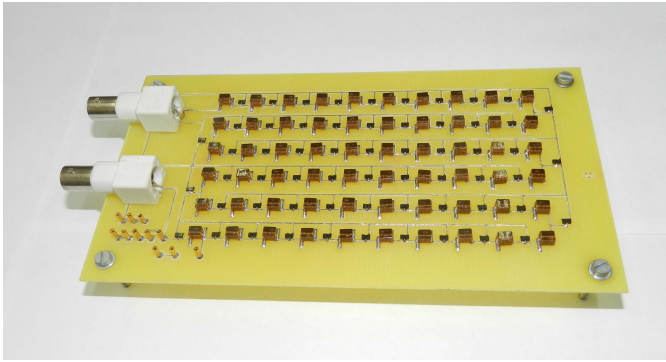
Capacitive NLTL assembled in a PCB with surface mounted devices.
